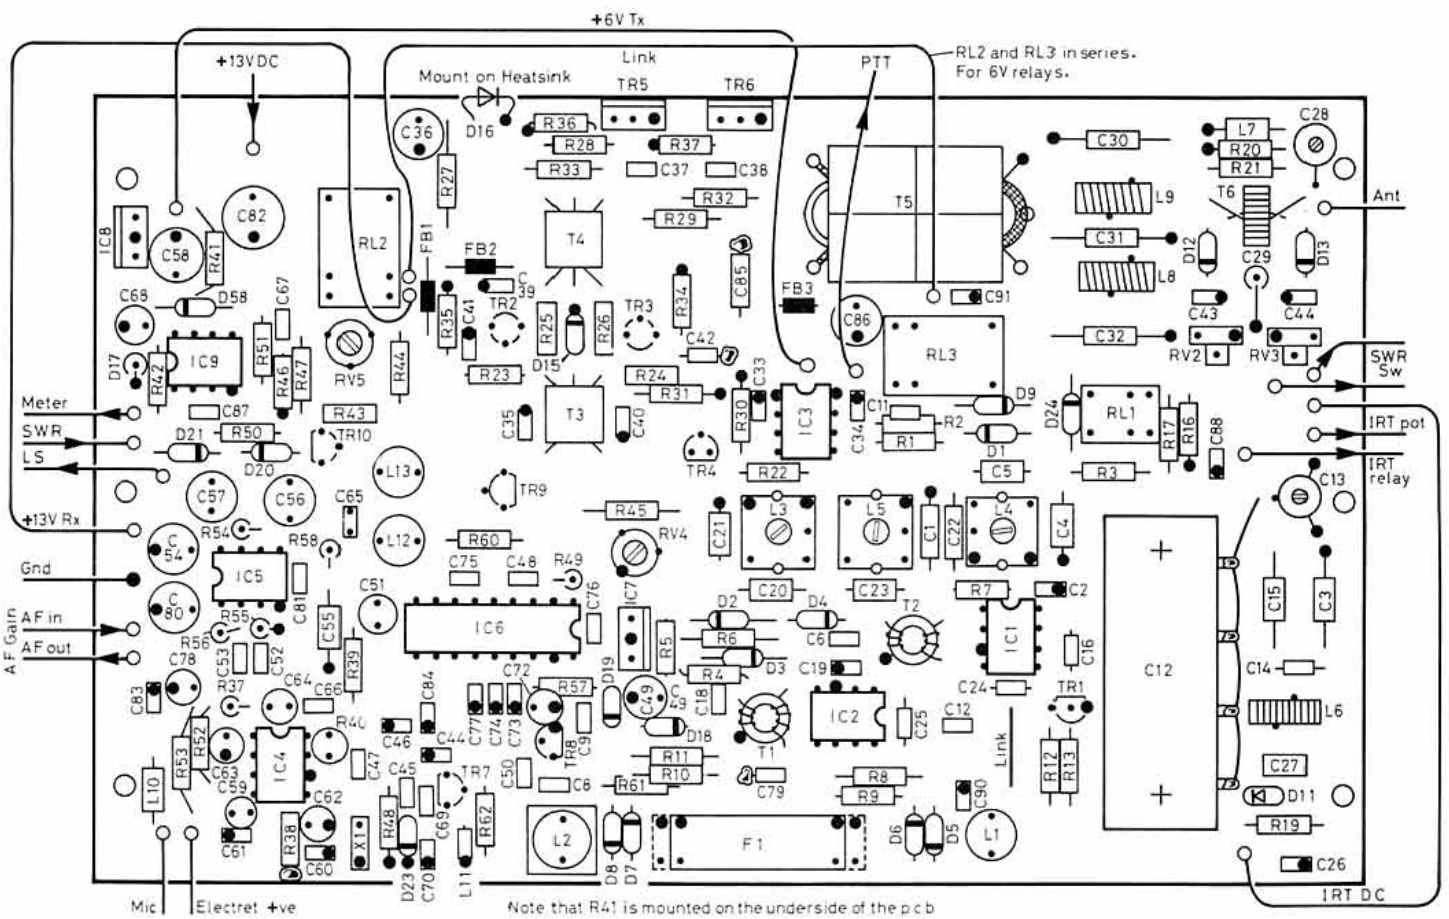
Component overlay (actual size) viewed from the groundplane side of the PCB.
